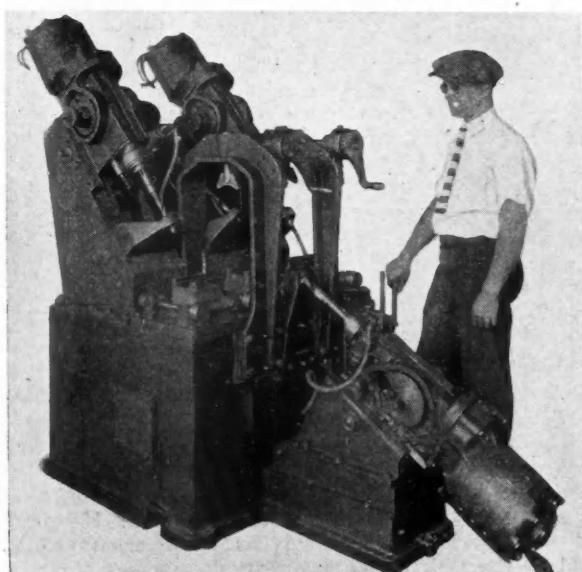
General view of four-way drilling machine made up of Millholland automatic drill head units
